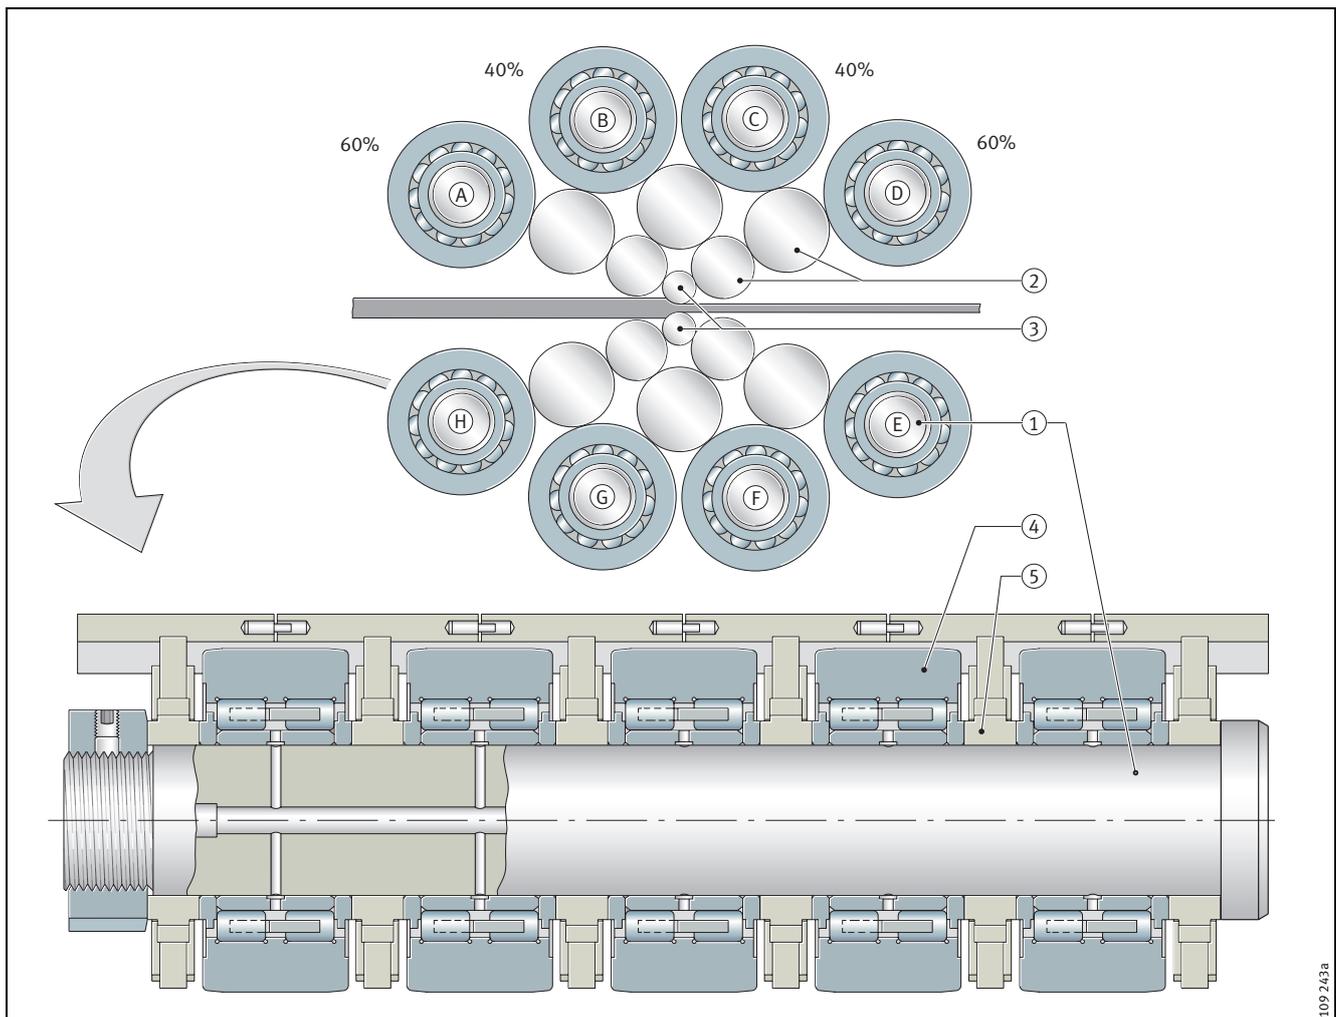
· Support shaft with back-up rollers (type 2) and support saddles
